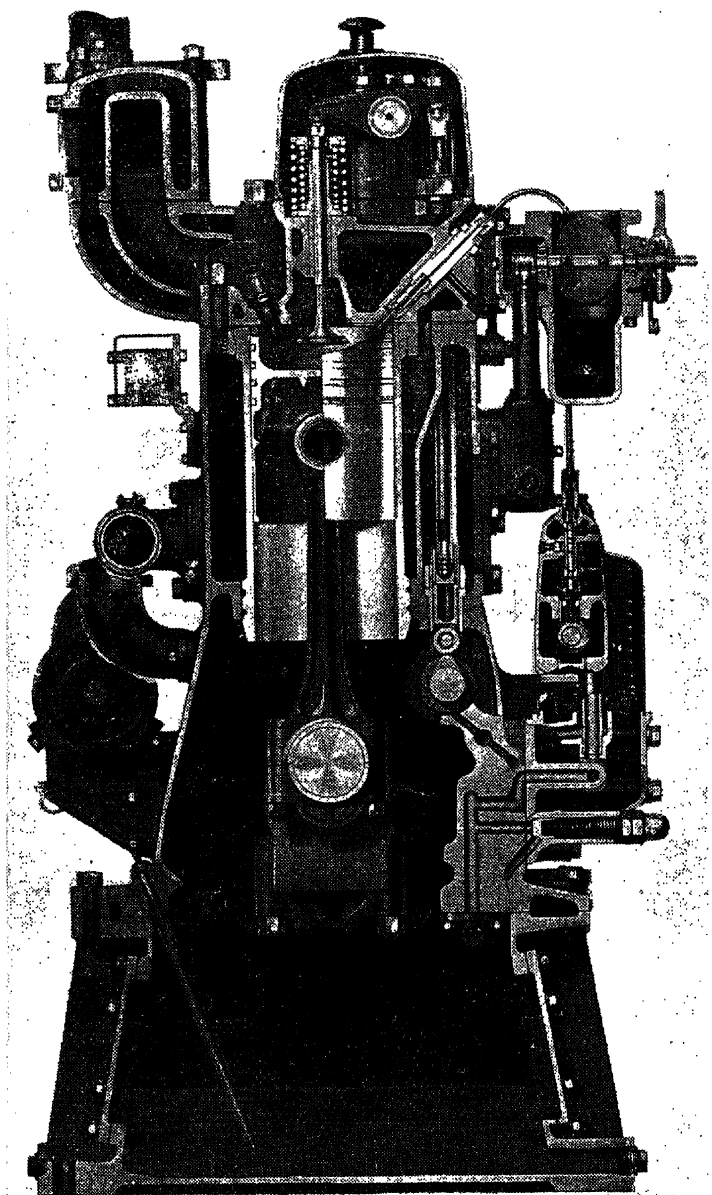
Cross-sectional View of the Waukesha Hesselman Engine.
